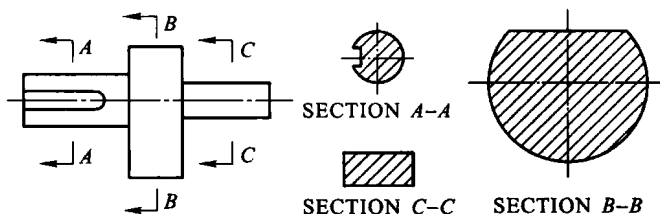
3 Sectioning Cut Symbol and Sectional View
